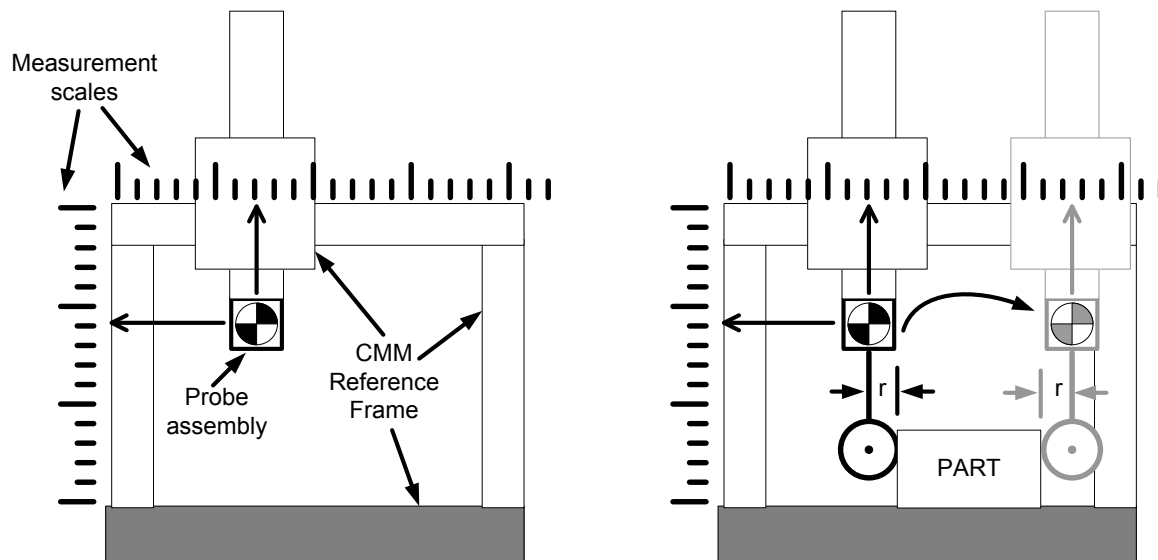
Simple CMM assembly showing a 2D coordinate system (*left*), two points probed at opposing ends determine part's lateral dimension, after probe radius is compensated (*right*)
